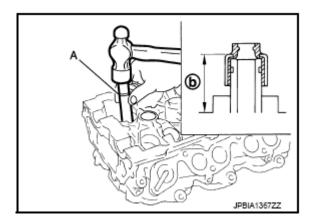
Pressing To Fit Valve Seal Using Valve Oil Seal Drift Courtesy of NISSAN NORTH AMERICA, INC.
